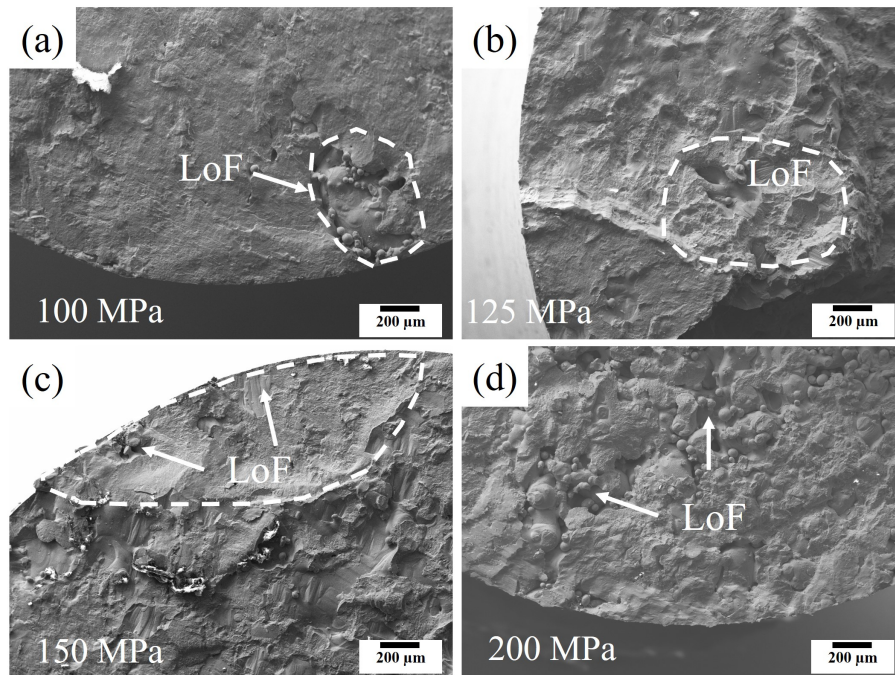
The fatigue fractography of AB specimens tested under different stress amplitudes showing the killer defects for crack initiation.
